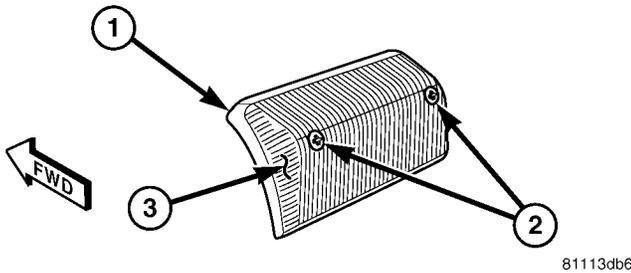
Center High Mounted Stop Lamp Remove/Install
